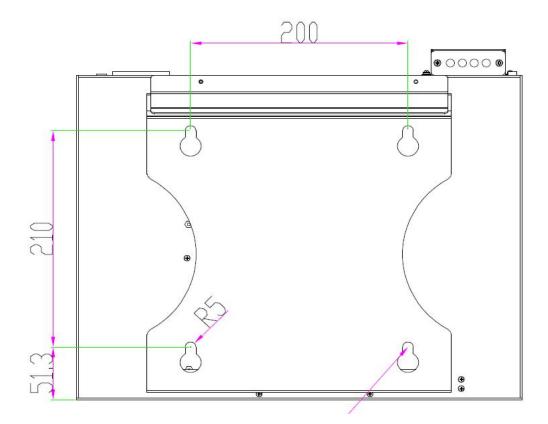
Installation diagram for AHF15A with wall-mounted type
